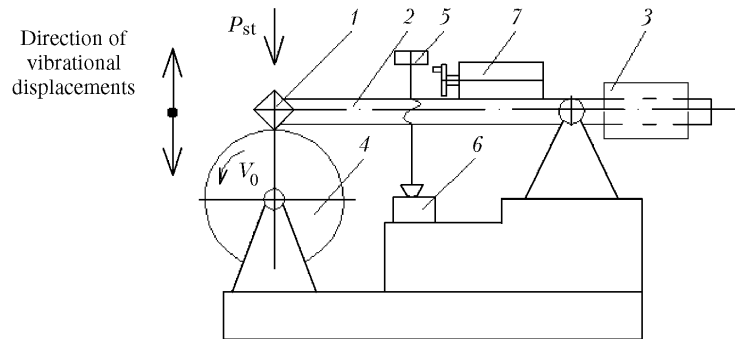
Schematic diagram of the experimental unit for sawing brittle materials in a vibroshock mode: 1) processed billet; 2) boom; 3) counterweight; 4) sawing disk; 5) adjusting screw; 6) elastic laying; 7) vibrodrive.
